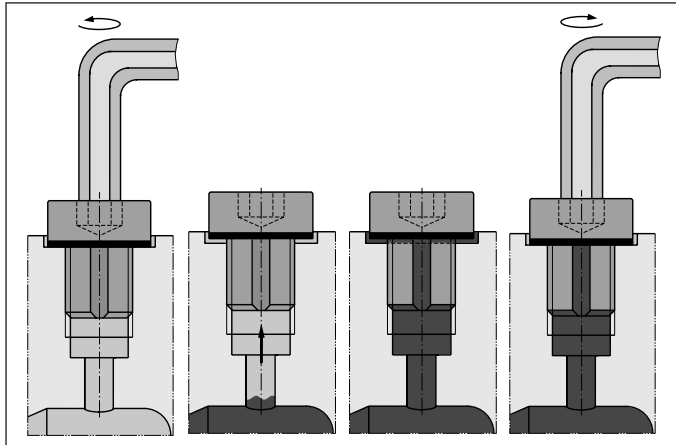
Filling and bleeding hydraulic cylinders with internal hexagon bleed screw
